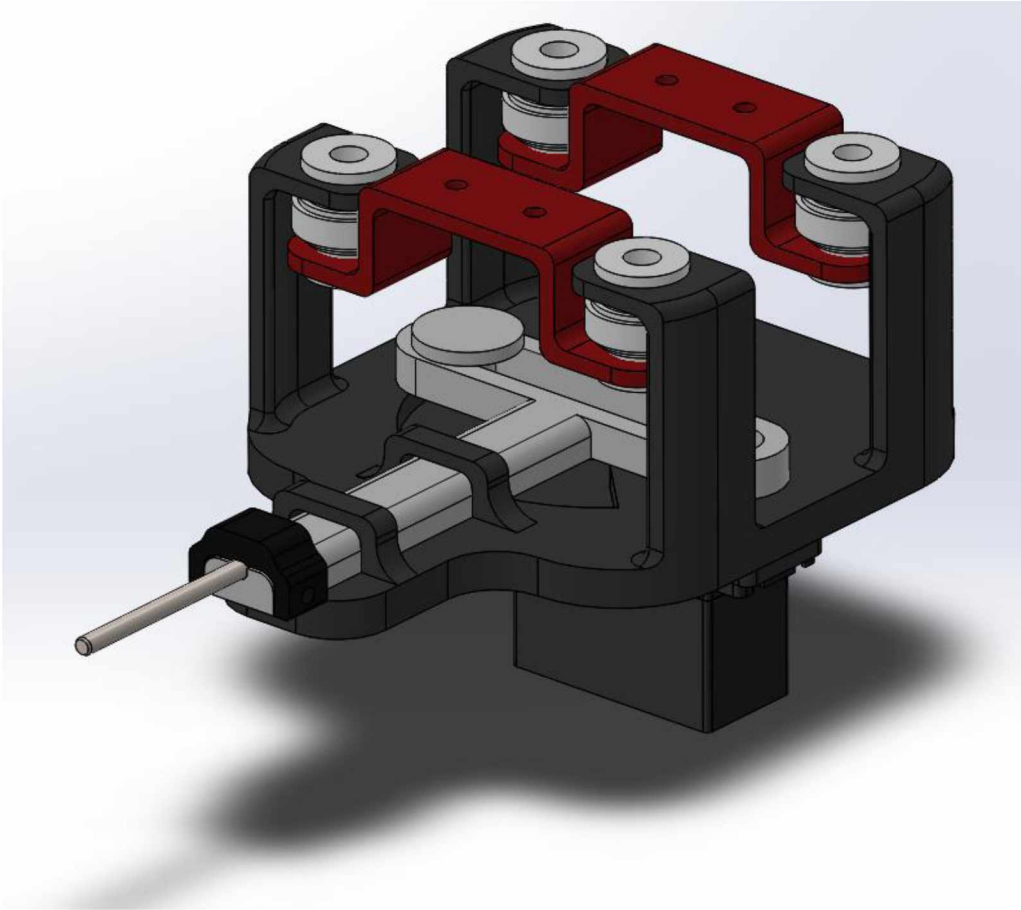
Actuator assembly comprised of a servo, servo mount, Scotch yoke, vibration damping balls, and adapter between damping balls and UGV
